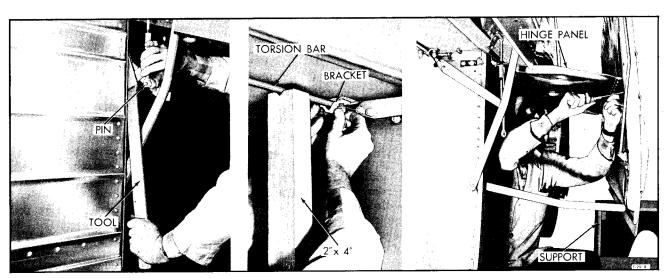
A—Install or Remove Lock Link Pin, Control Arm End of Torsion Bar, and Lower Hinge
